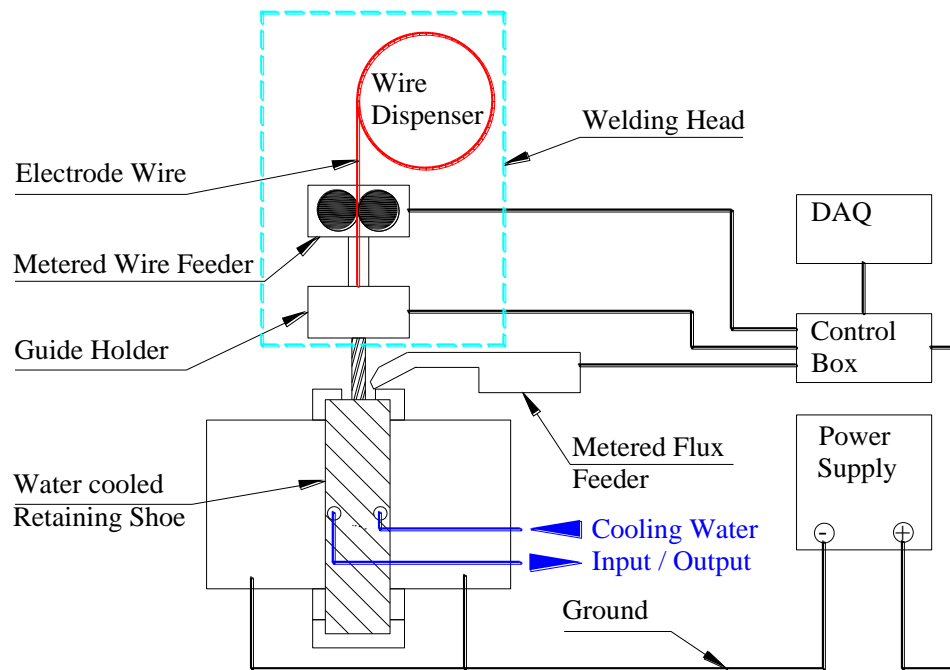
ESW-NG Weld Set-up
